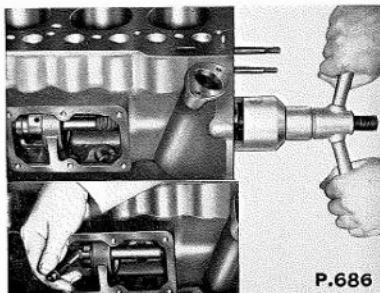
Fitting the new front intermediate camshaft bearing, using the Churchill Tool 32 in conjunction with the adaptor set R.G.32-5 (Inset shows the method of bearing removal)
